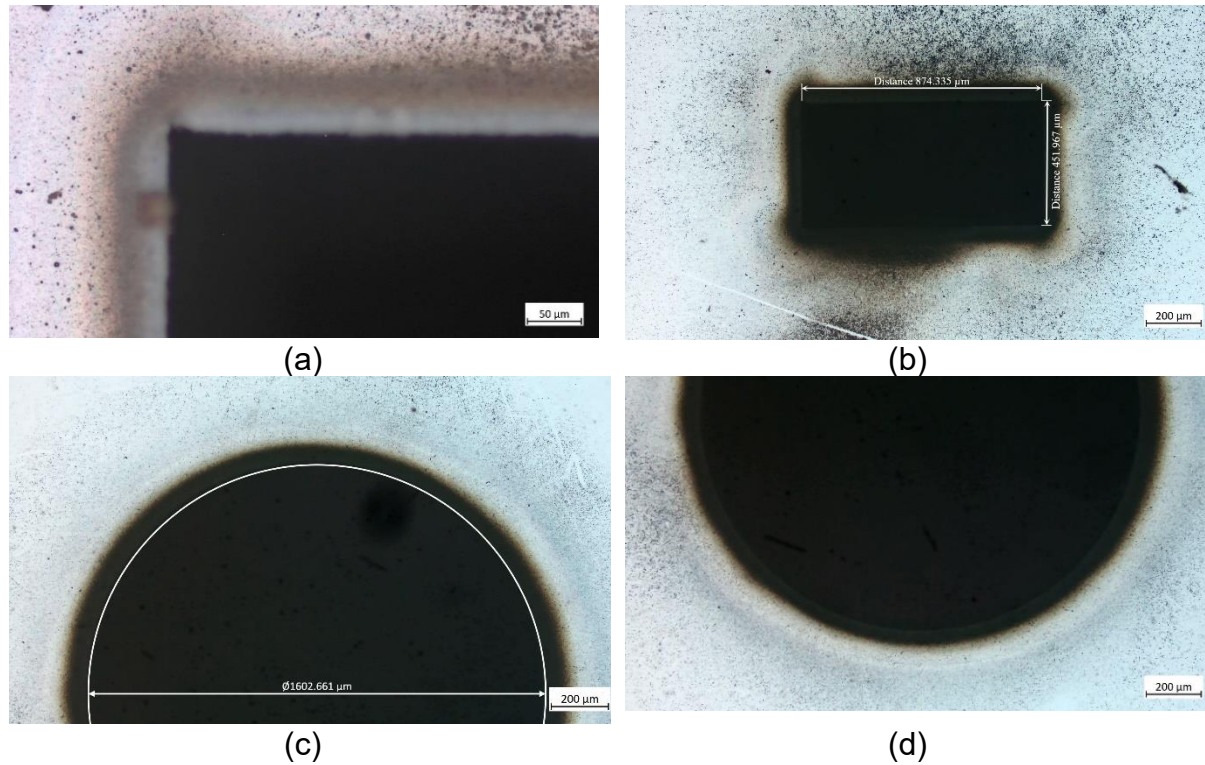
Detailed inspection of laser cut shim using microscopy. (a) and (b) close-up view of the waveguide port. (c) and (d) Close-up view of the laser cut alignment hole.
